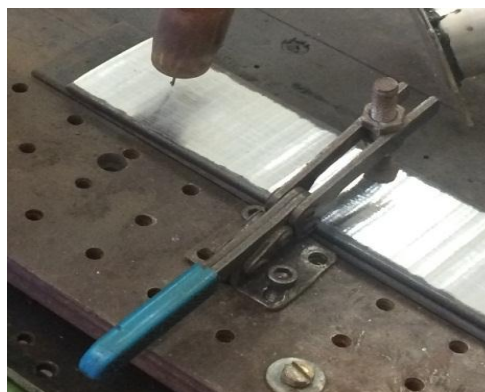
Clamping system for supporting of plate during the welding process.
